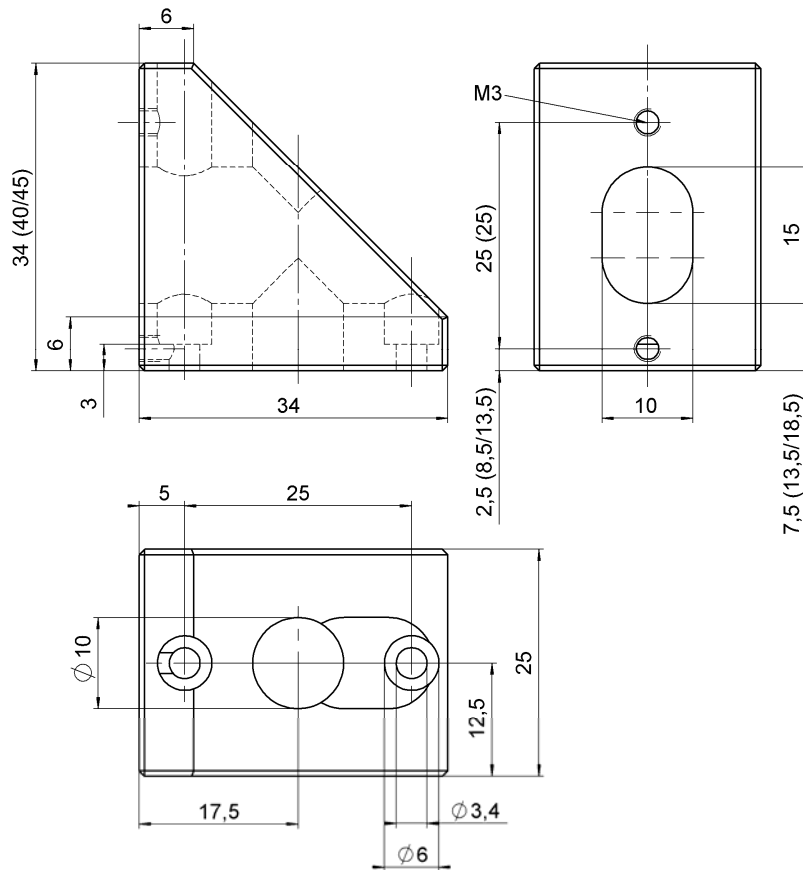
M-11x Adapter bracket, dimensions: M-110.02 (M-110.03/M-110.04) in mm
